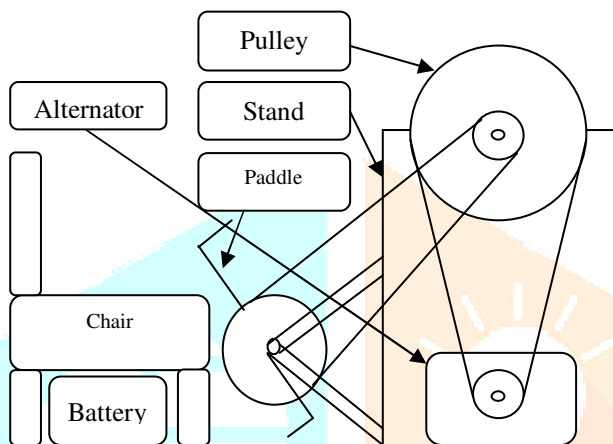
Modified Paddle Power Electricity Generator Machine Set-up.
